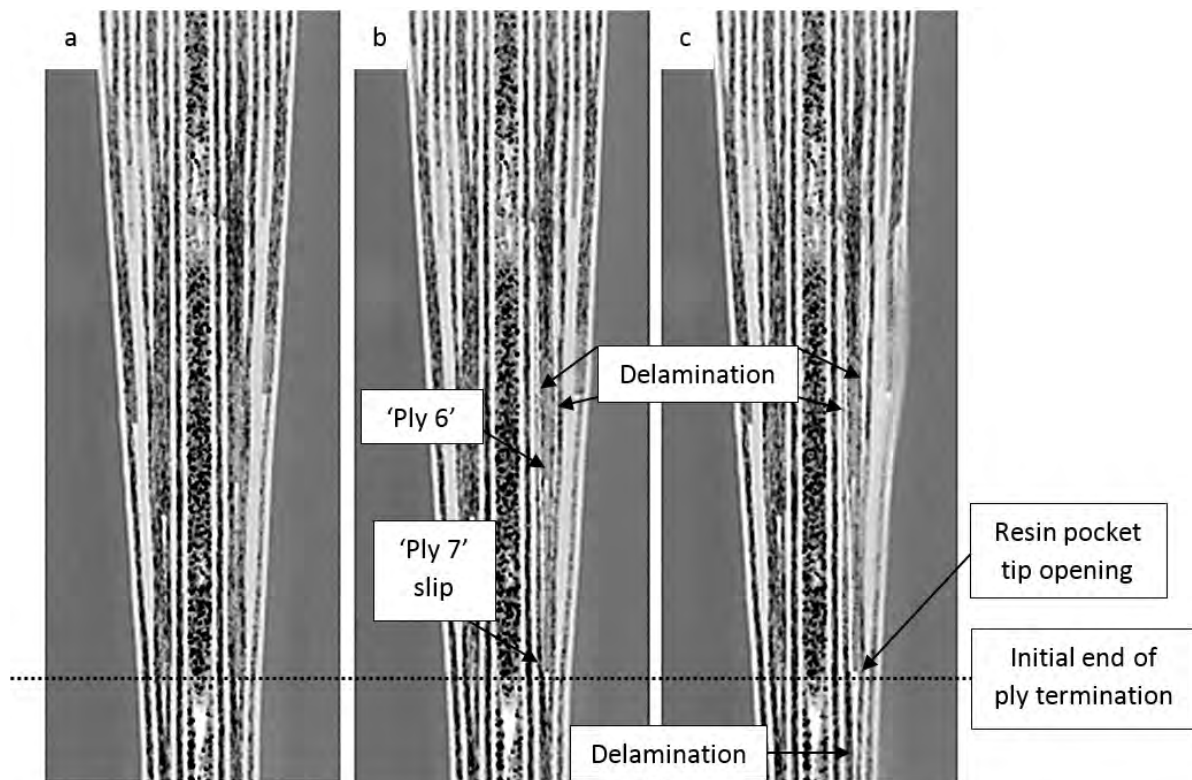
Image frames from an optical high-speed camera of the failure stages for a typical baseline specimen: (a) prior to delamination, (b) resin pocket rupture and delamination, and (c) specimen catastrophic failure.
